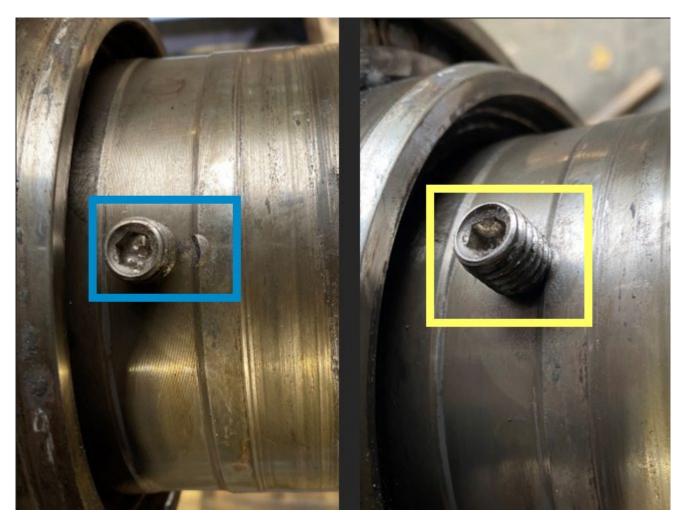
Blue box showing approximate start location of step-drive main-shaft alignment flange set screw. Yellow box showing set screw alignment with indentation mark on step-drive main-shaft machined shoulder.
